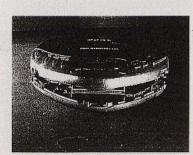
Successful active disassembly of the macro assembly of the Sony CD player.
